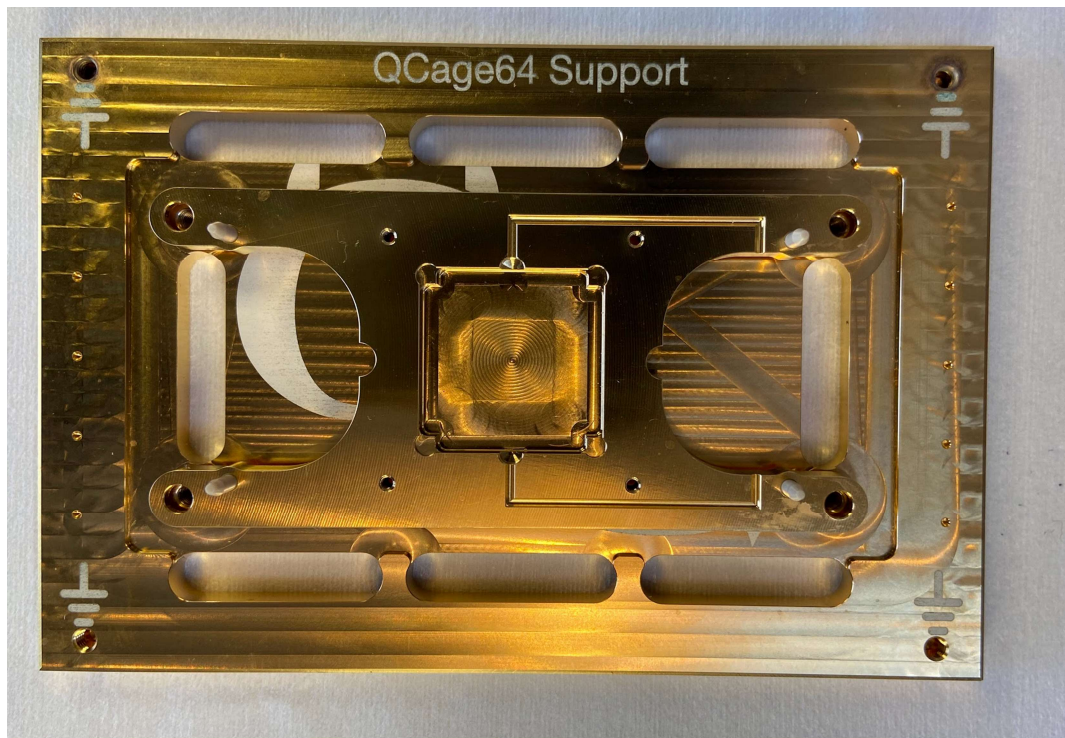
Chip holding frame (QCAGE-64-FRM) on top of the support fixture (QCAGE-64-WBF).
